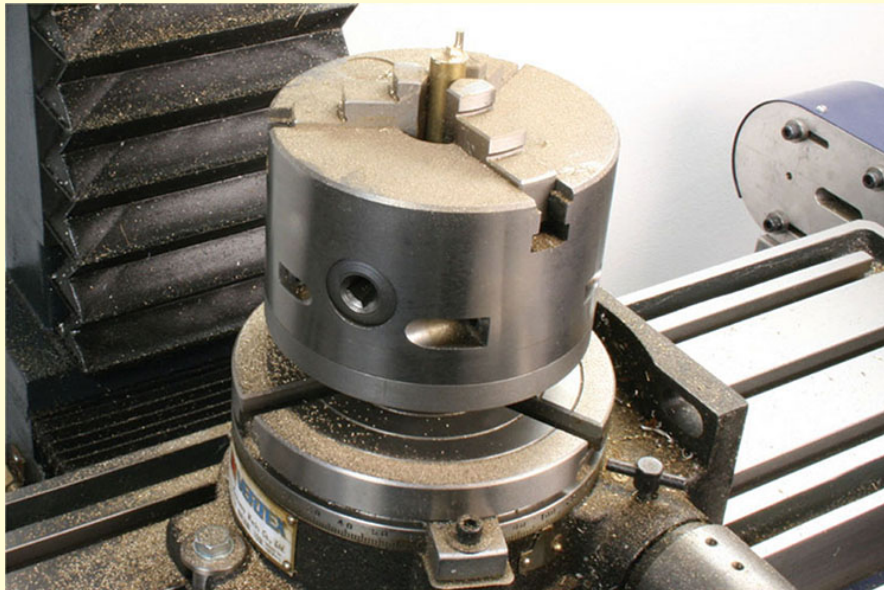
One way of holding a bar to machine the steady pin from the end.
